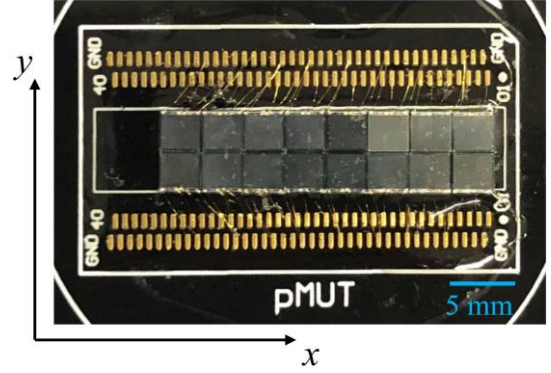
Top view of the 32-channel ScAlN pMUT array composed of 16×2 pMUT chips wirebonded onto the PCB. The bonding wires were encapsulated to prevent damage during immersion.
